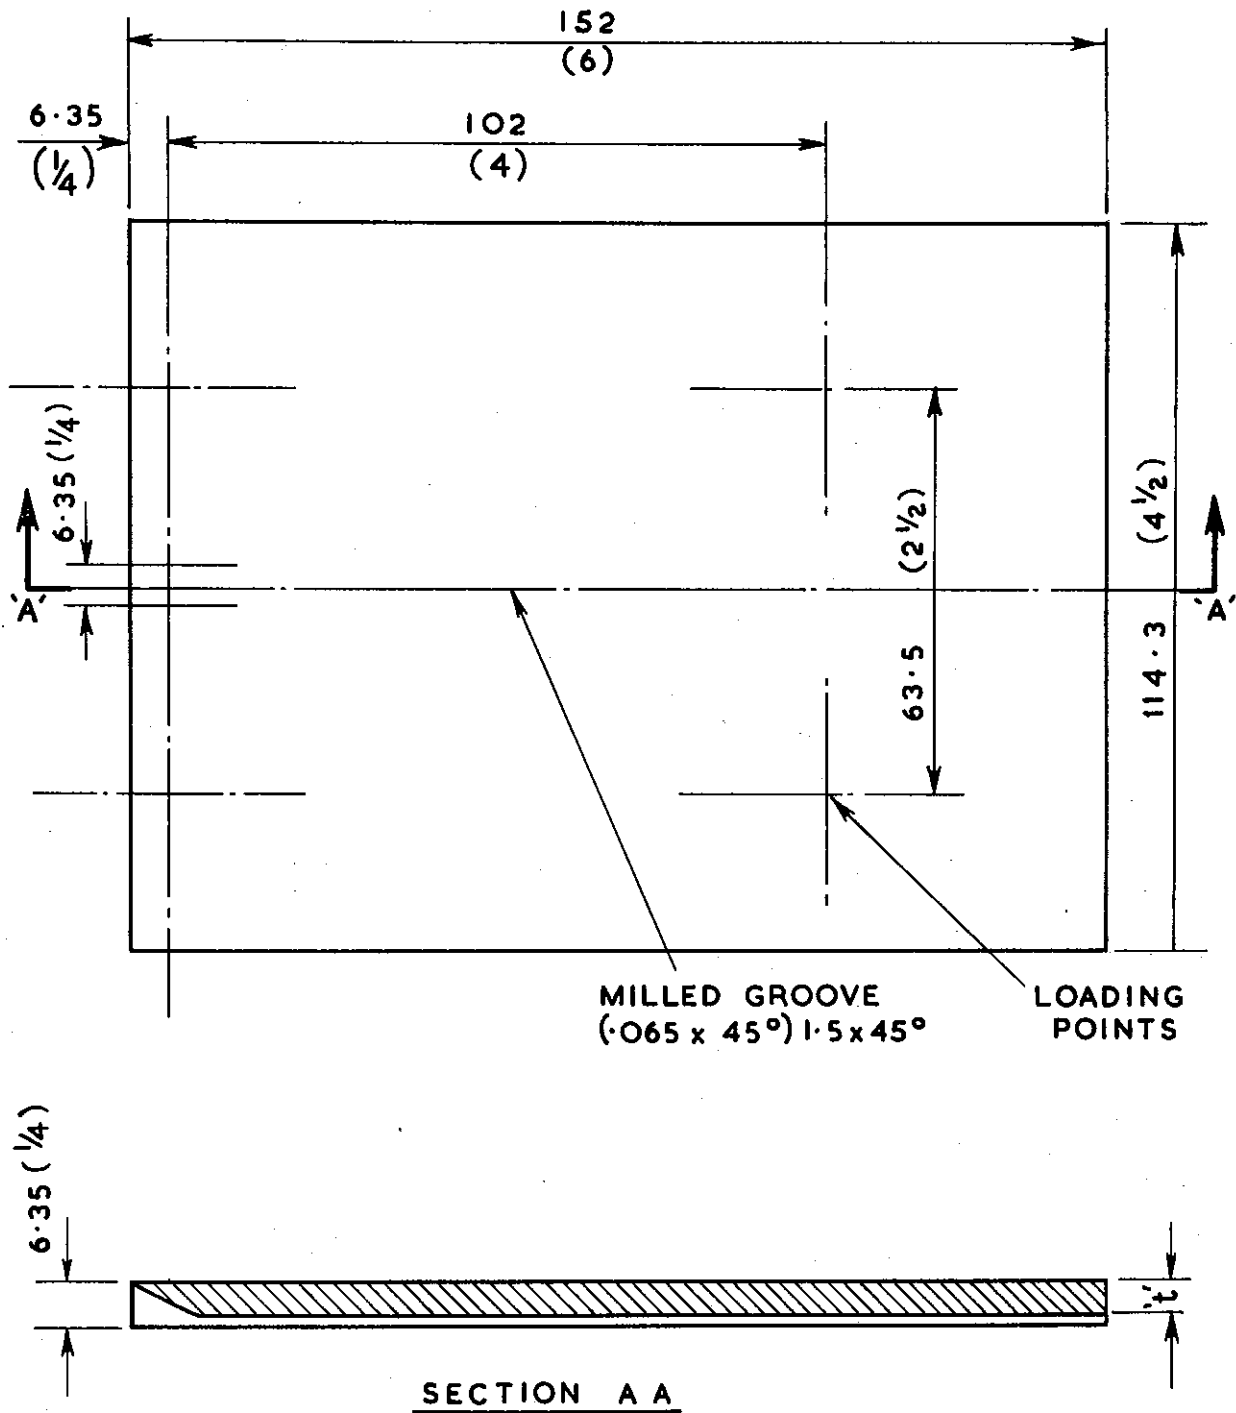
RESIN FRACTURE TOUGHNESS SPECIMEN, DIMENSIONS IN MILLIMETRES (AND ALSO IN INCHES)
